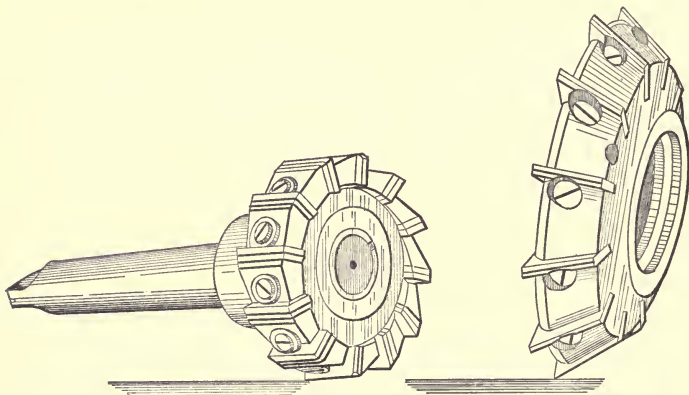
AND 89.—INSERTED-TOOTH MILLING-CUTTERS.
